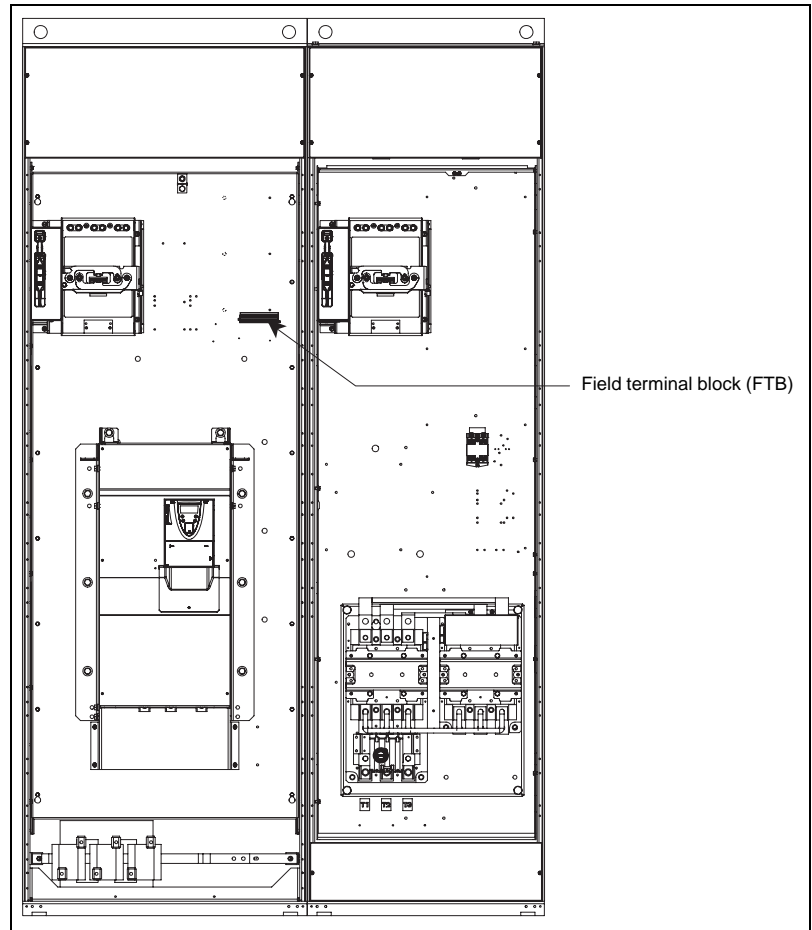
Full Section Barriercd Bypass Unit with Altivar® 61/71 Drive
